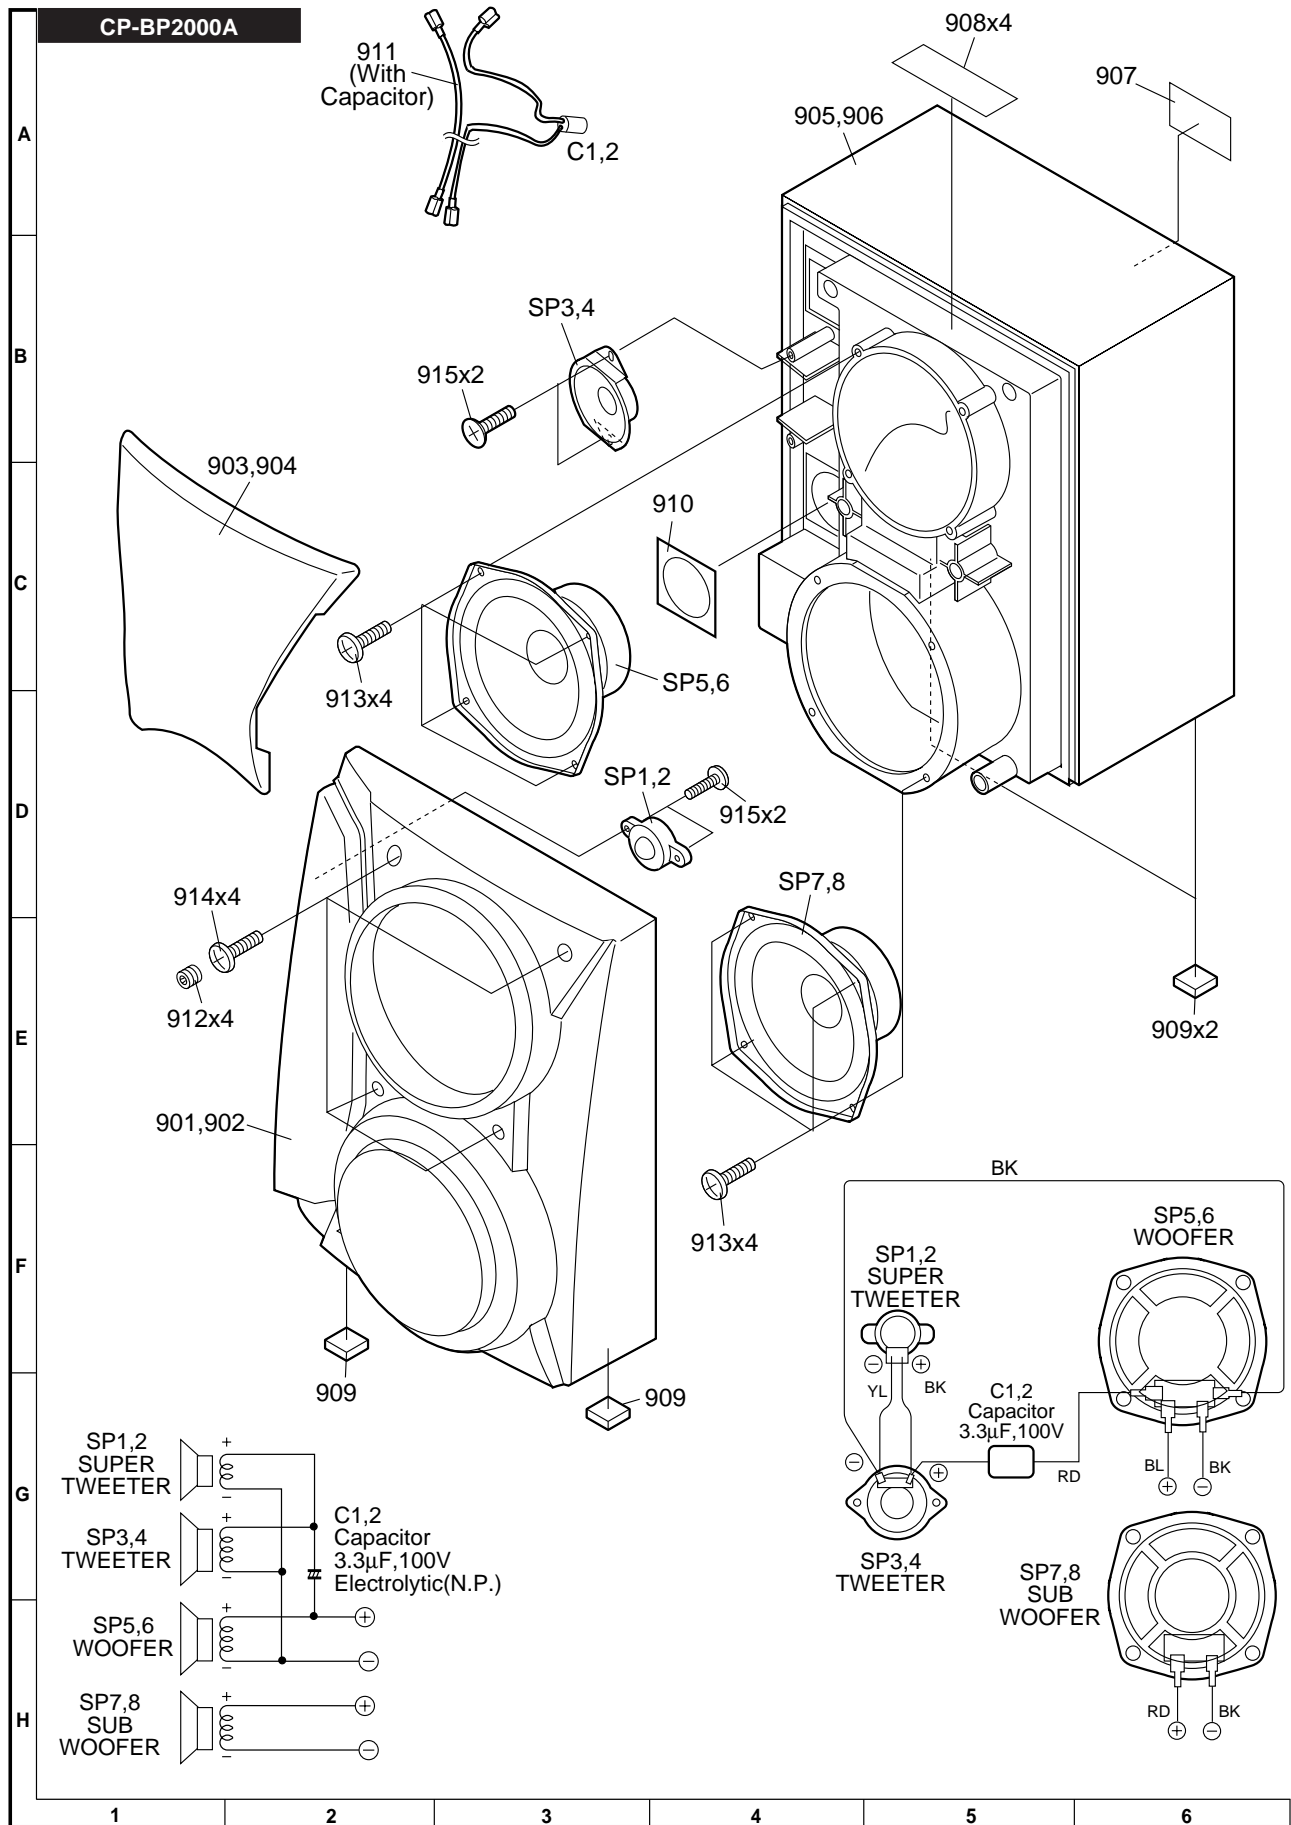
SPEAKER EXPLODED VIEW (3/3)
